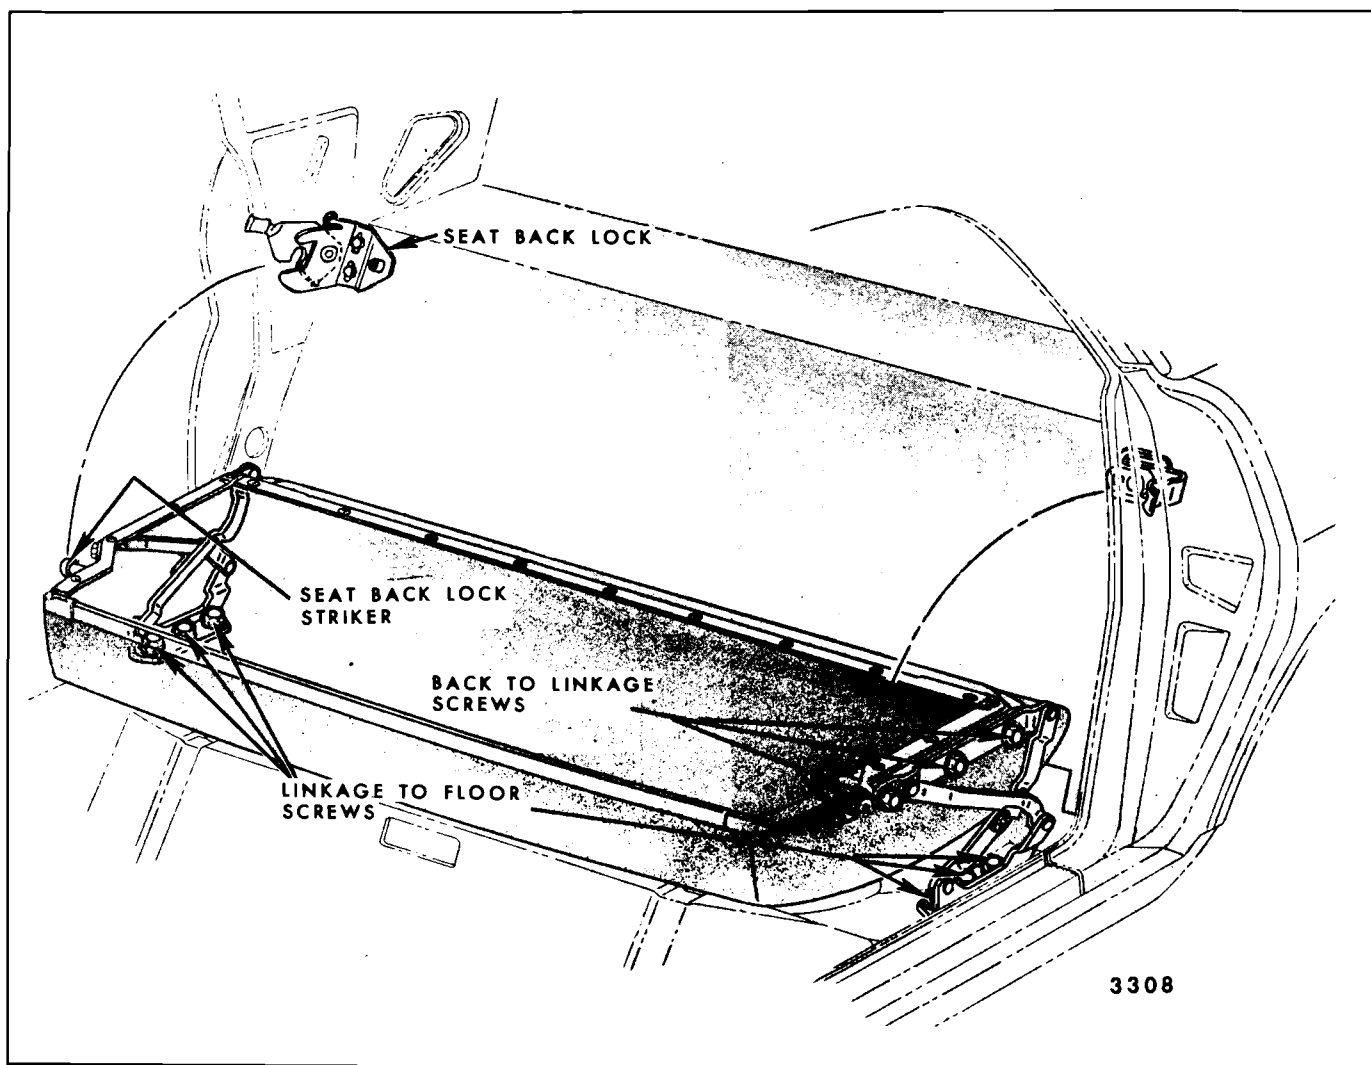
Folding Rear Seat Back and Lock - Corvair
